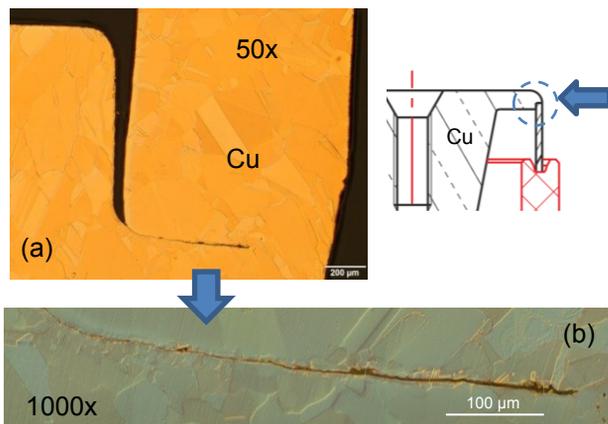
Cold window. Cu-Cu welding joint. Fa. CPI.
